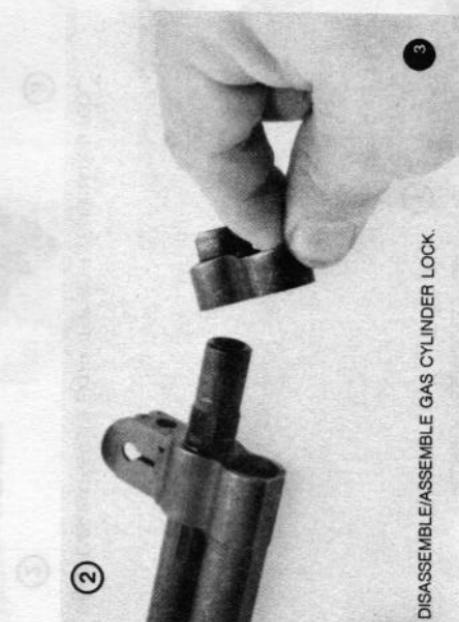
Disassembly / assembly of gas cylinder group (1 of 2).
